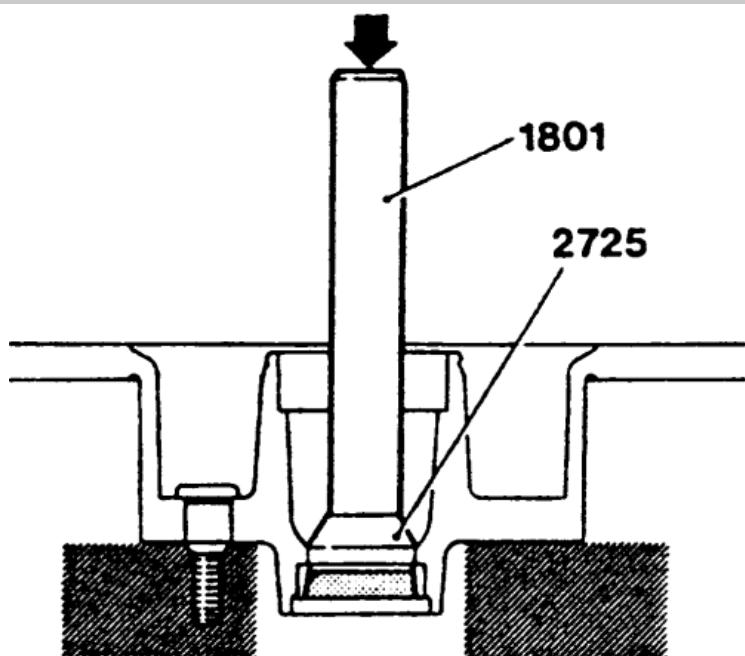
Removing the outer bearing race from the hub using drift 2725 or equivalent
